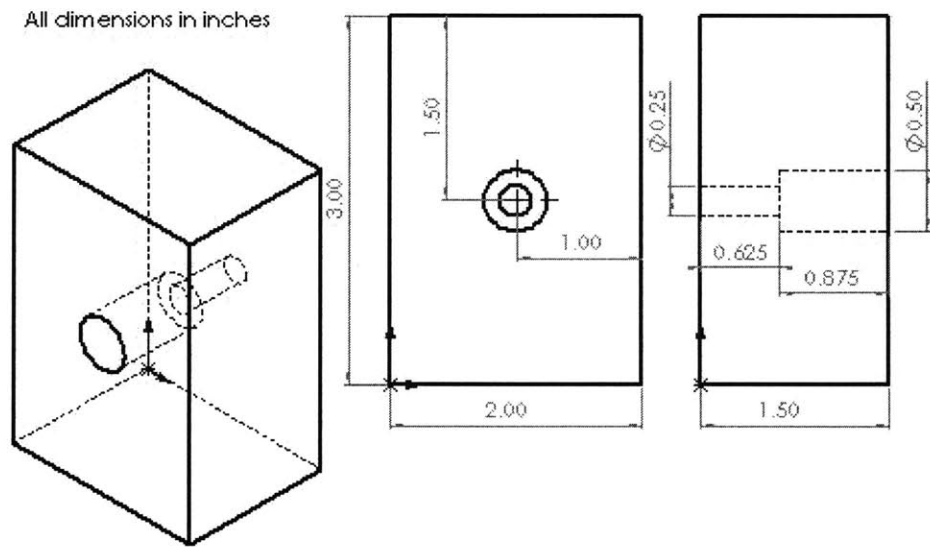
Dimensions of the backing plate for the magnets used in the magnet-across-coils system.
